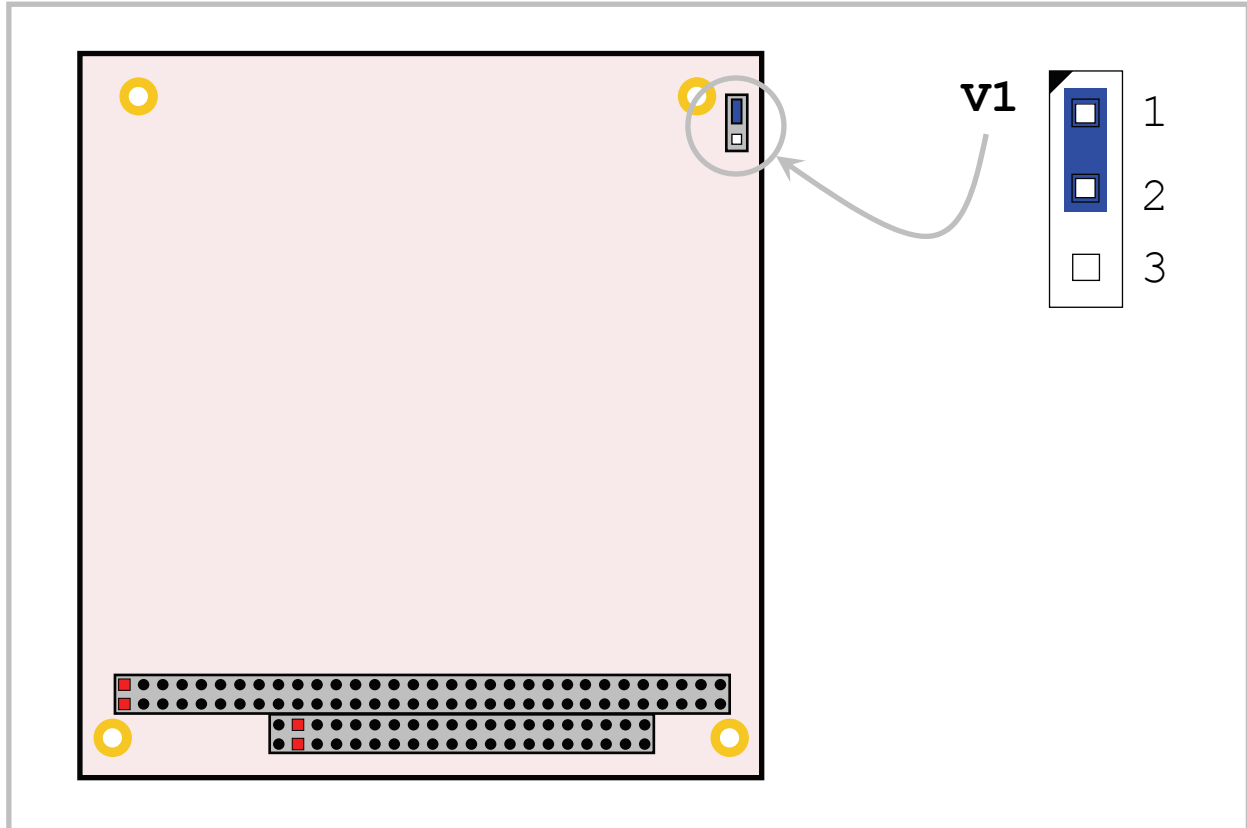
V1 Jumper Block Location – Rev. 1.xx Boards
